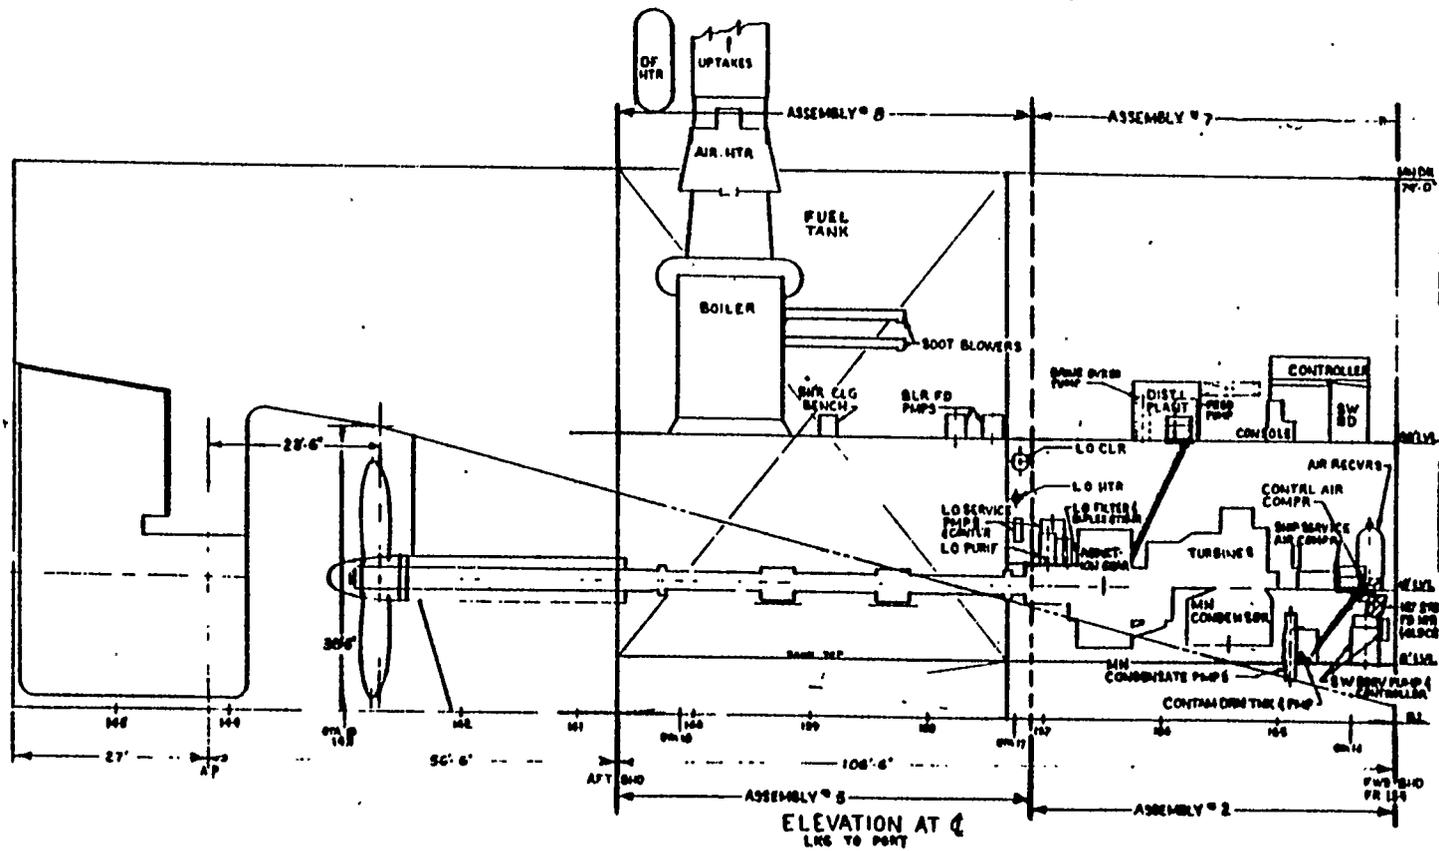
Steam Turbine Arrangement (Sheet 1 of 6)
